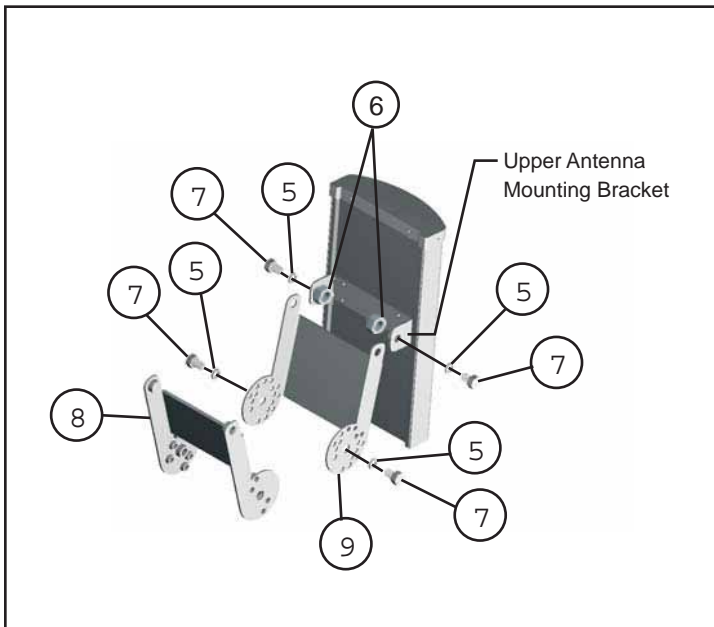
Fastening Downtilt Bracket Assembly to Upper Antenna Mounting Bracket.
